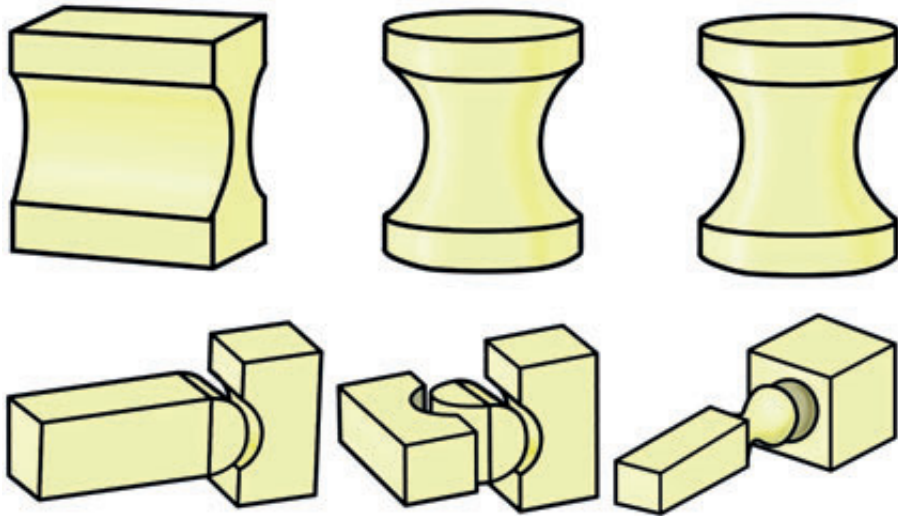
A3— Fundamental Joint Design. Top left: One-piece (compliant) planar joint. Top Middle: One-piece (compliant) universal joint. Top right: One-piece (compliant) spherical joint. Bottom left: Multi-piece planar joint. Bottom Middle: Multi-piece universal joint. Bottom right: Multi-piece spherical joint.
